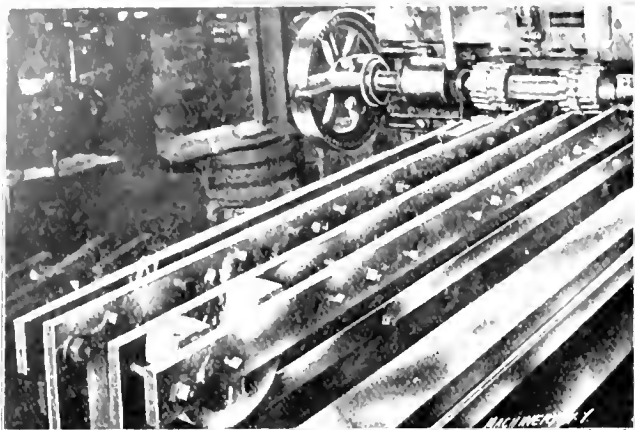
Fixture for Holding Eccentrics and Eccentric Straps while Milling the Ends
